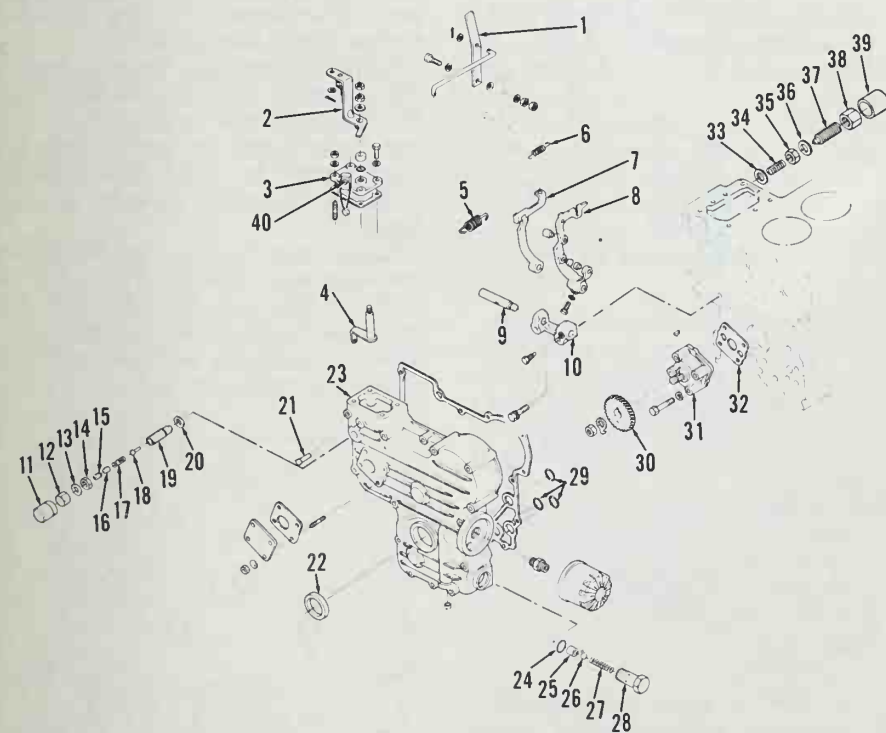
Exploded view of timing gear cover and associated components. Be sure "O" rings (29) are in place when installing cover (23).
